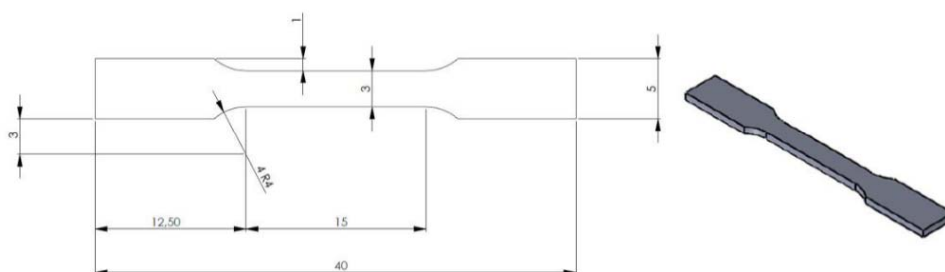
The gauged dimensions of the specimens for tensile test [15].
